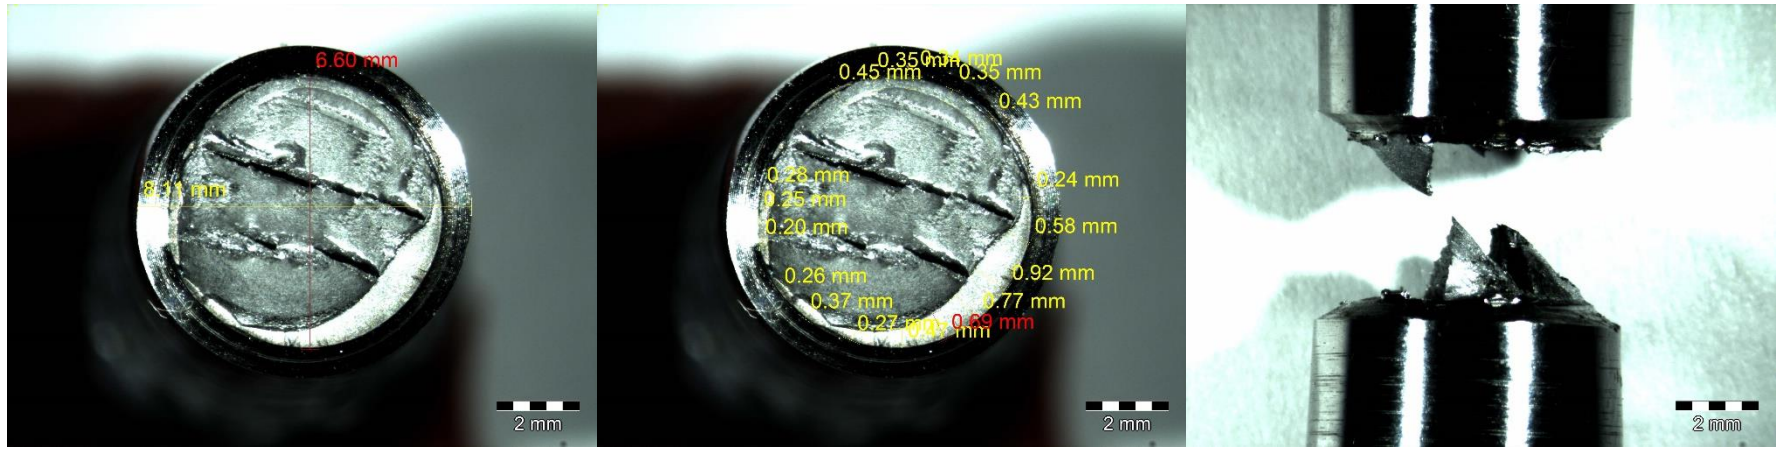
Cross-sectional and side view of fractured StxLSD-02
